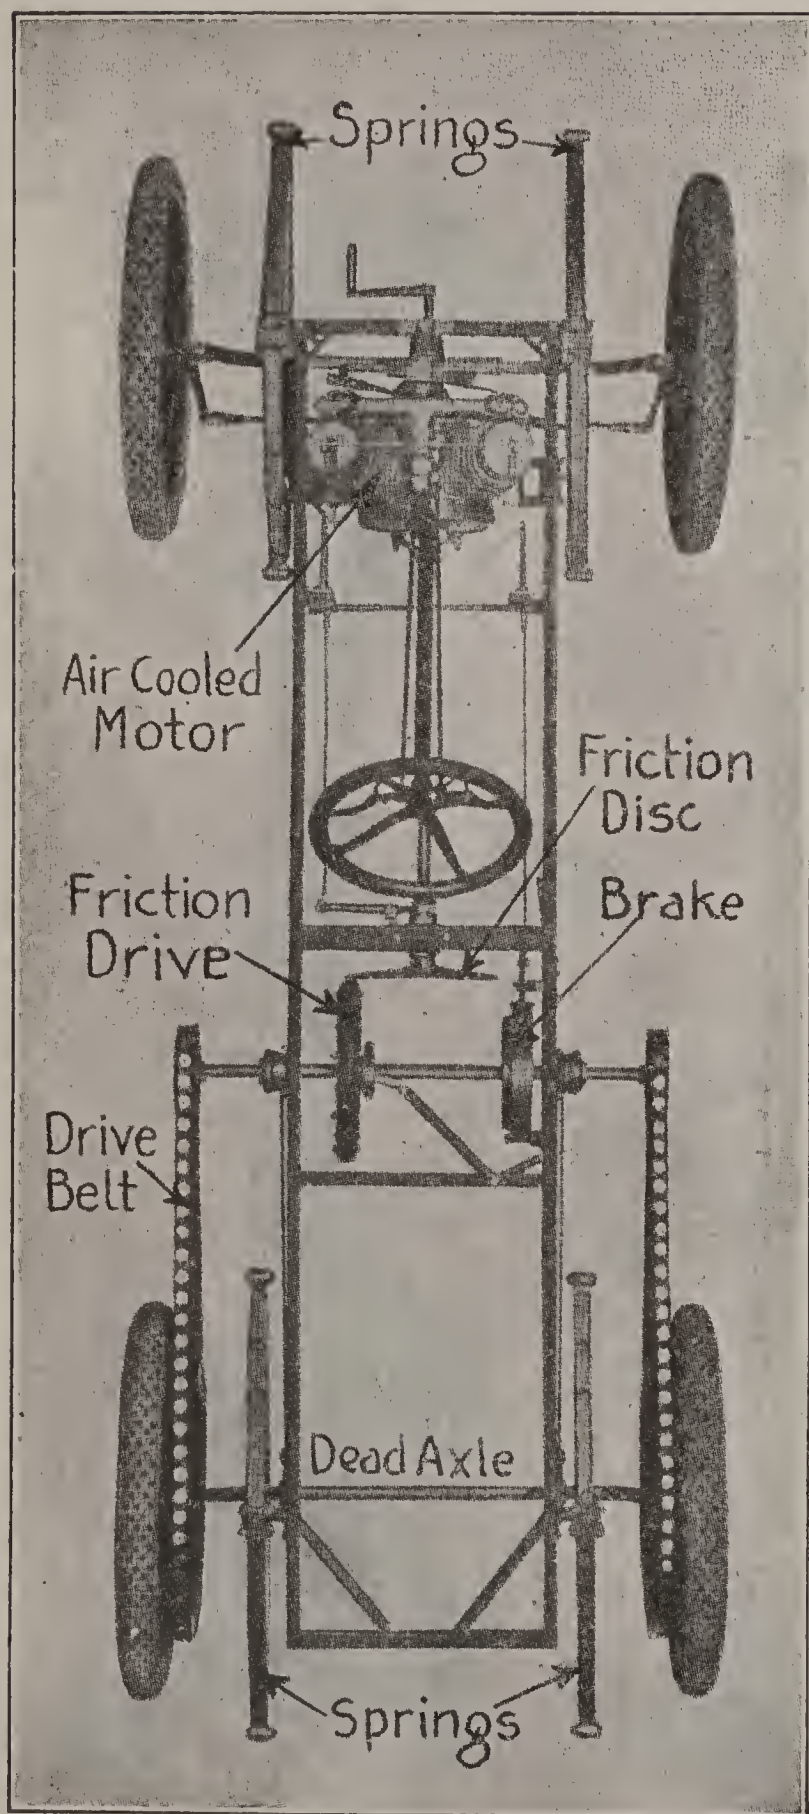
Chassis of the Merz Cyclecar, Showing Arrangement of Parts and Substantial, Simple Design.
